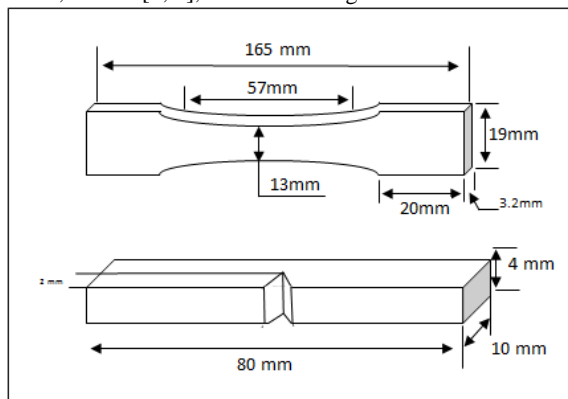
The dimensions, of specimens for Tensile and Impact test
